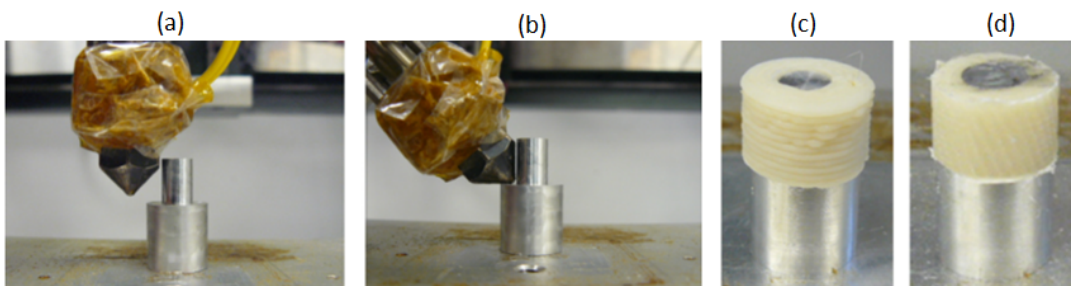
(a) 3-axis machine cannot reach but (b) a 5-axis machine can. Aluminium embedded before (c) and after (d) machining. From [103].
